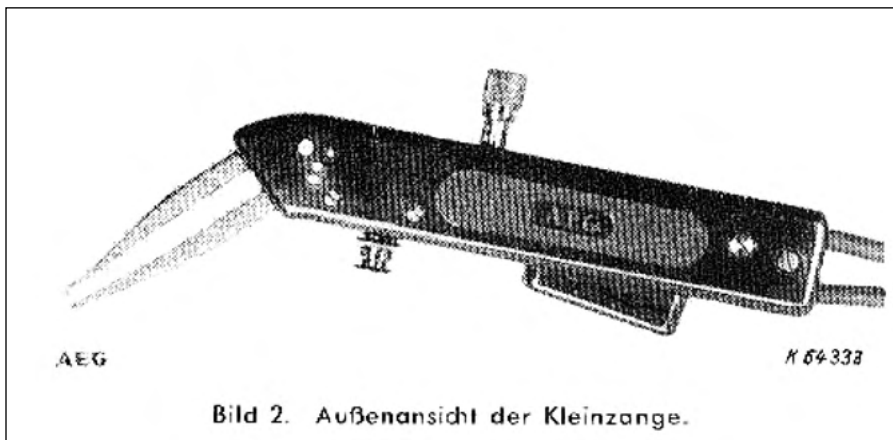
Assembler's hand tool for the AEG welding system. (Users Manual, <http://cdvandt.org/AEG-Mitteilungen-9-12-1943.pdf>)
